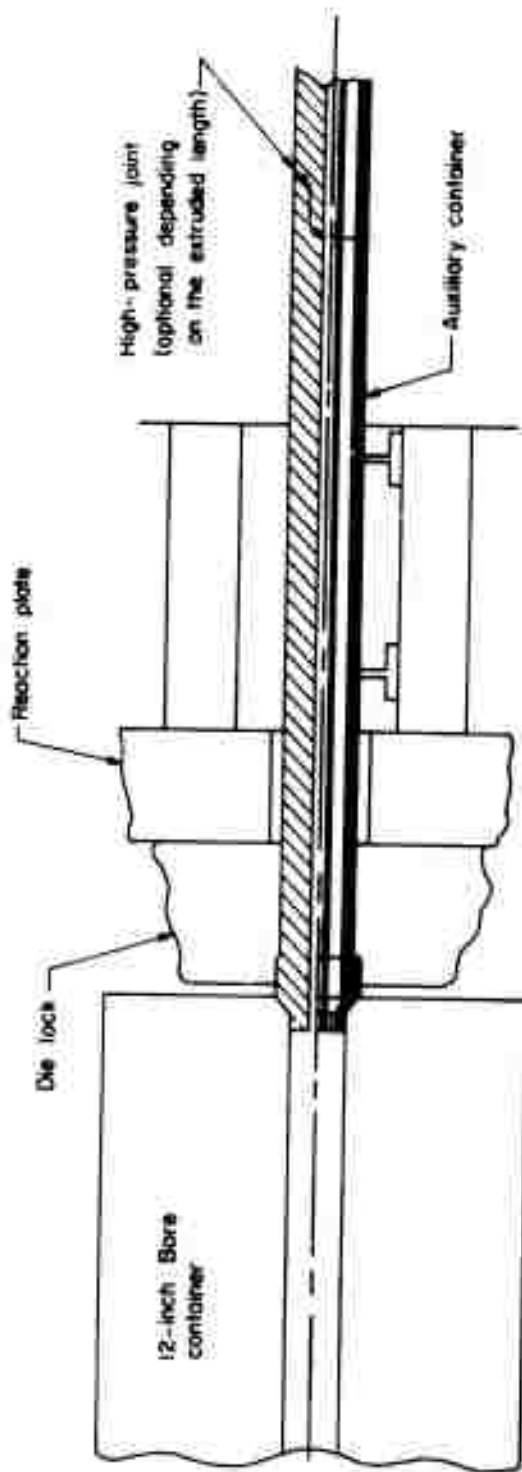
AN AUXILIARY CONTAINER EXTENSION TO PRODUCE LONG EXTRUSIONS USING FLUID-TO-FLUID TECHNIQUES
